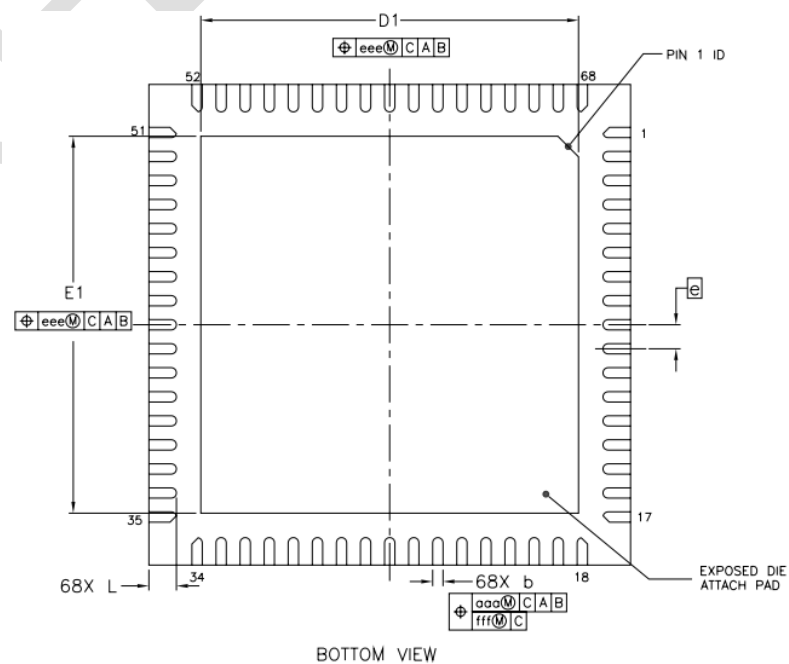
RKNanoD-N QFN68 Package Bottom View
